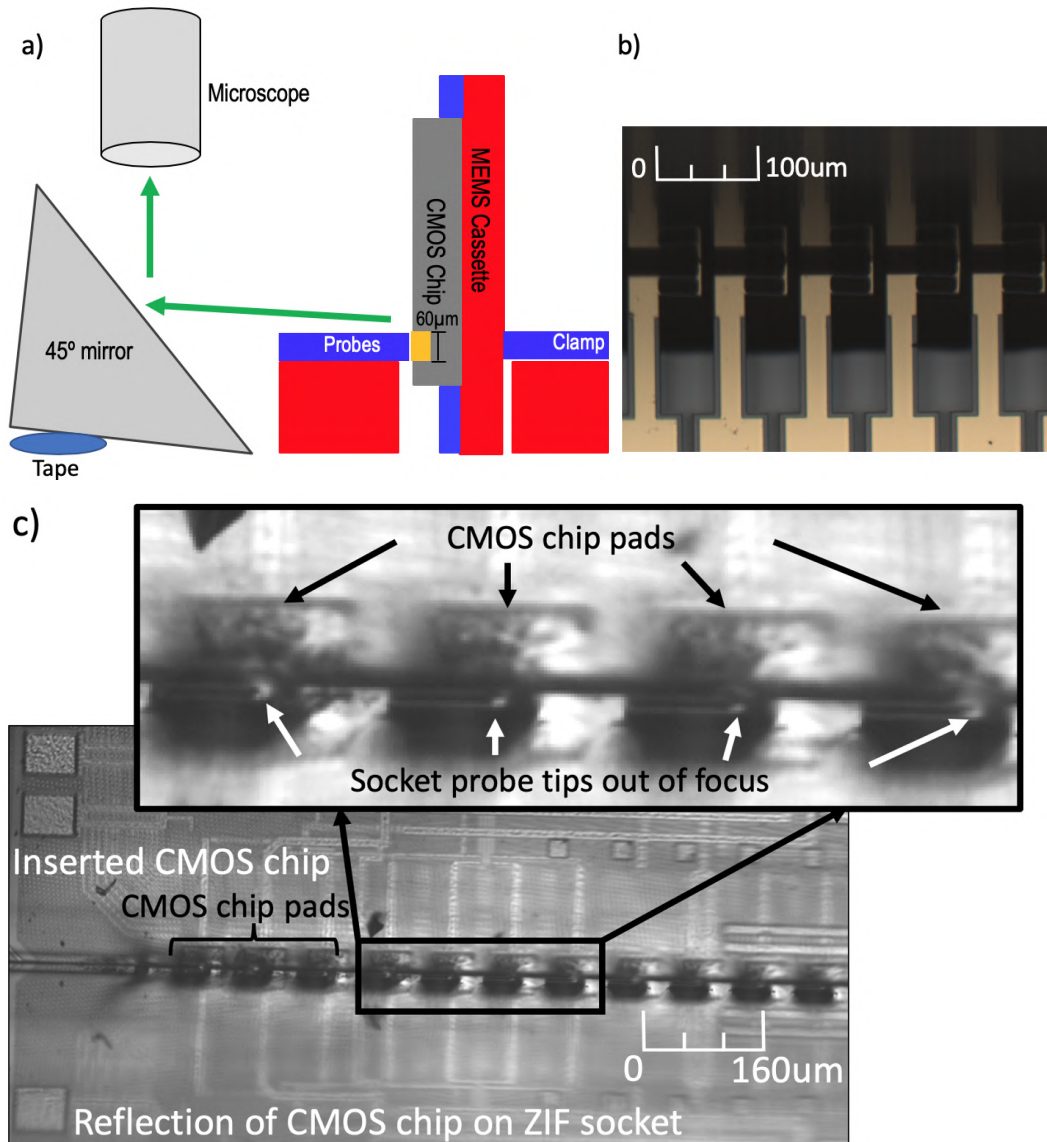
a) The test setup used to confirm alignment between the probes and pads. The 45° mirror is slightly angled with tape to be able to see the connection. b) The engaged ZIF socket probes after assembly. The probe tips at the top of the image are simply the reflection of the vertical CMOS chip. c) Microscope image from the setup in a). The SCµM pads are 53µm by 65µm pads on an 80µm pitch. The image is shown in grayscale to more easily recognize the probes.
